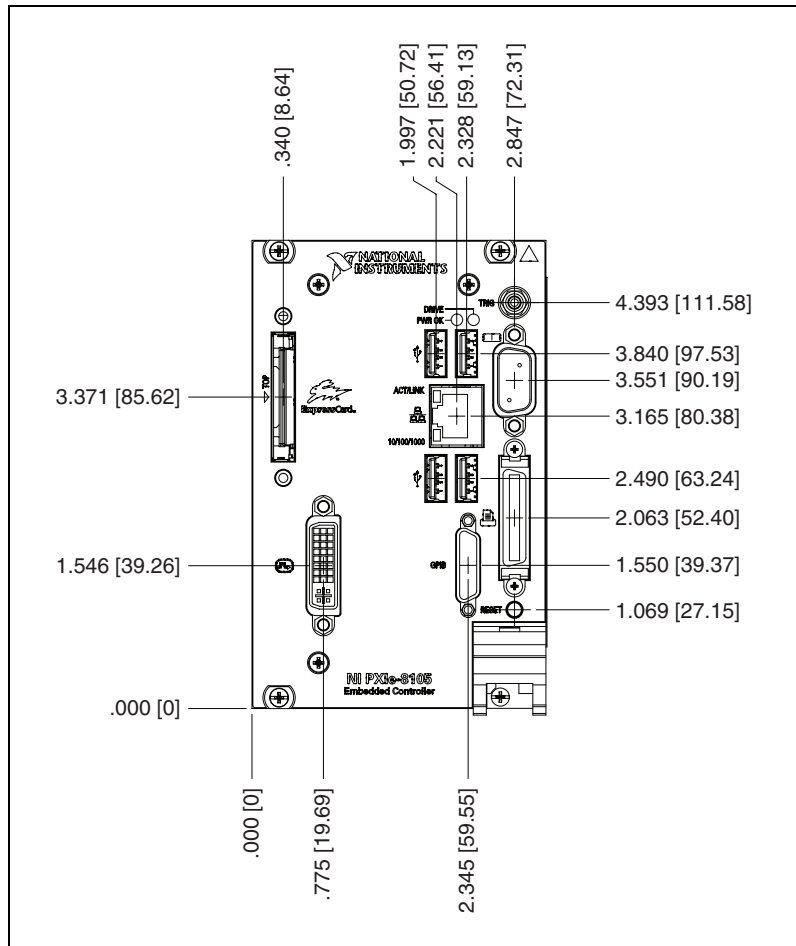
NI PXIe-8105 Front Panel Layout and Dimensions
